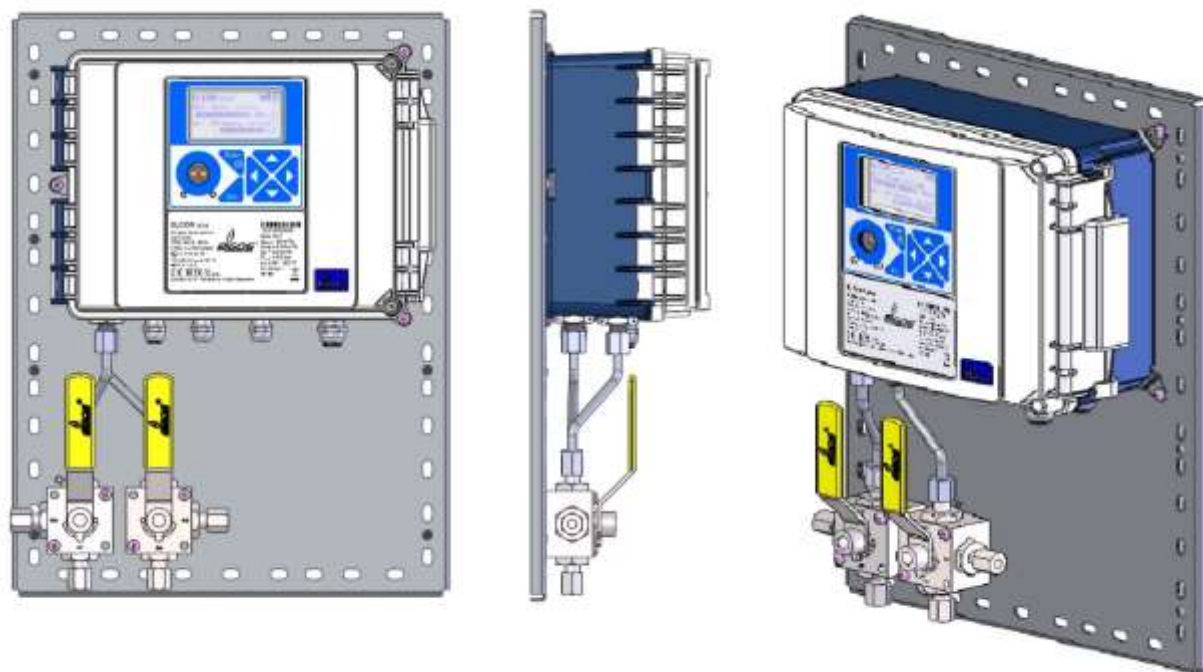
Mounting dual channel ELCORplus on a mounting plate
